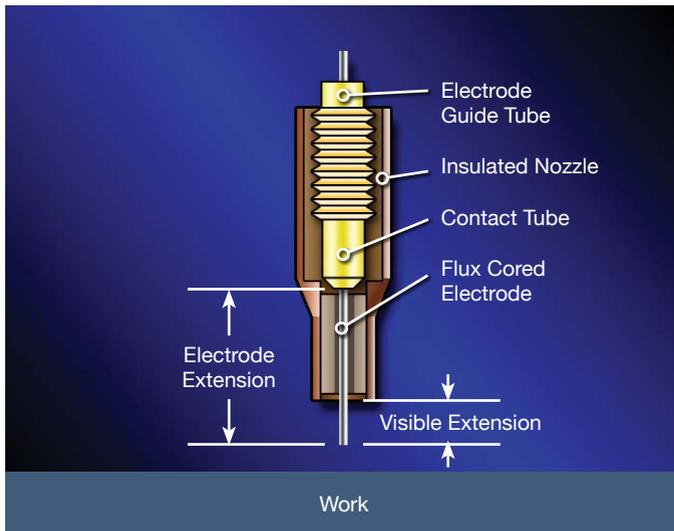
An Insulated Extension Guide to Ensure a Minimum Electrode Extension for Self-Shielded Electrodes
